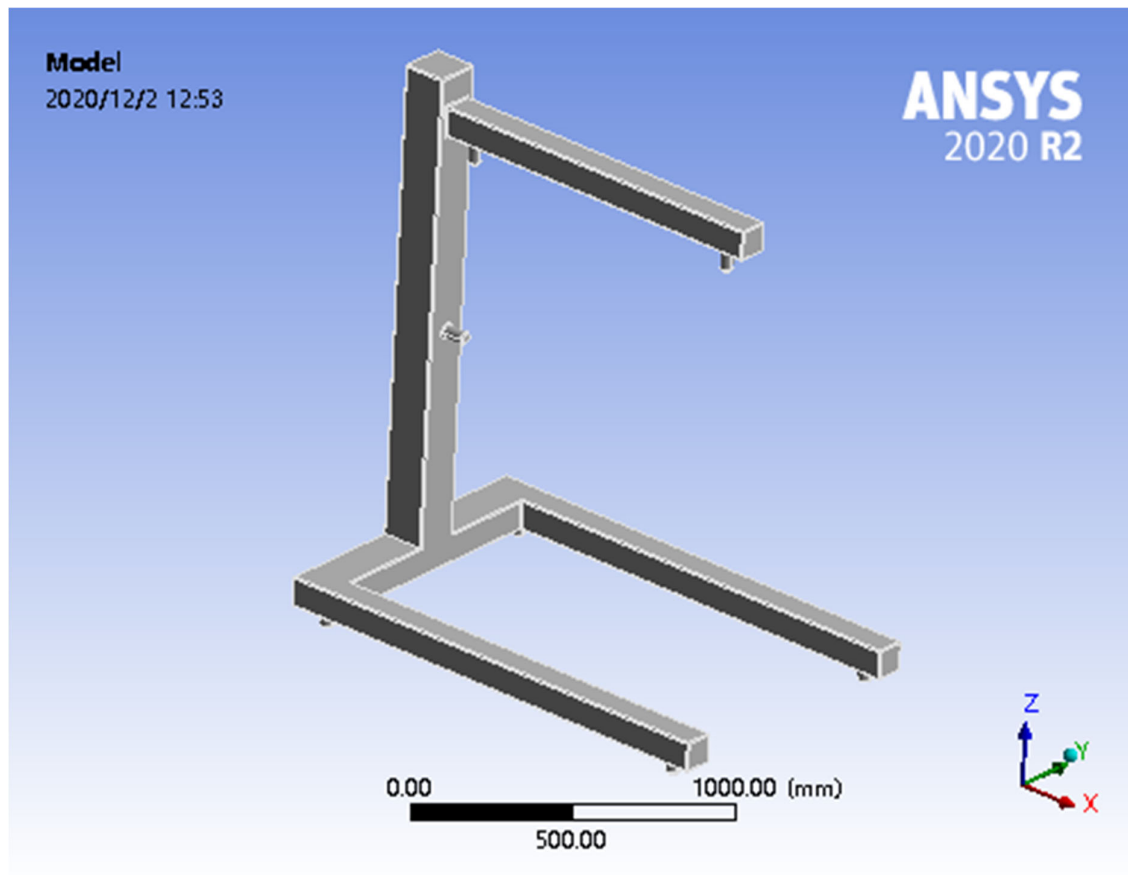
FIRST DESIGN OF FLOOR CRANES
